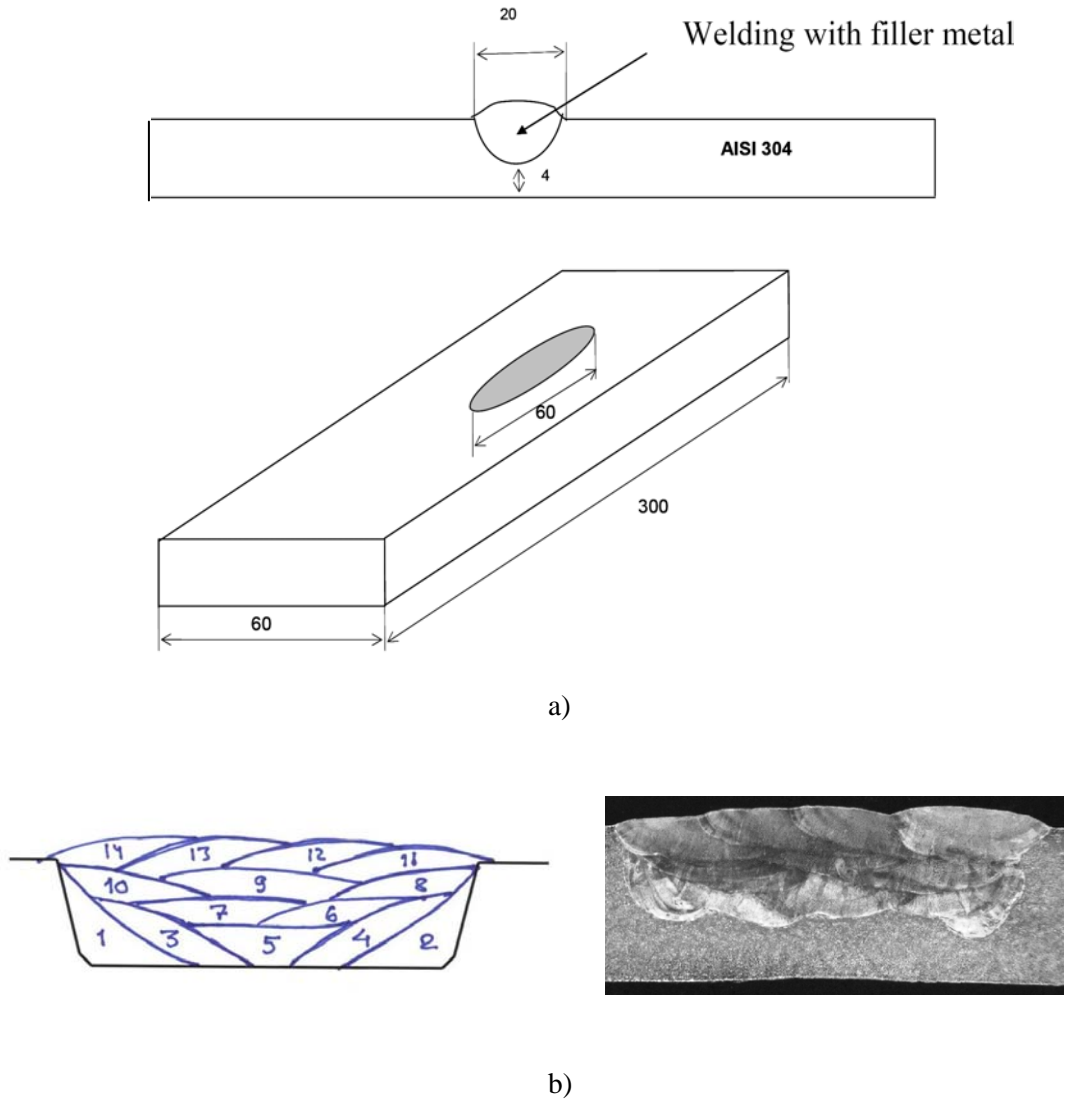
Test piece of pure weld metals (plain) a) and b) weld pass sequence of the test specimen welded with Alloy 82 filler metal.
